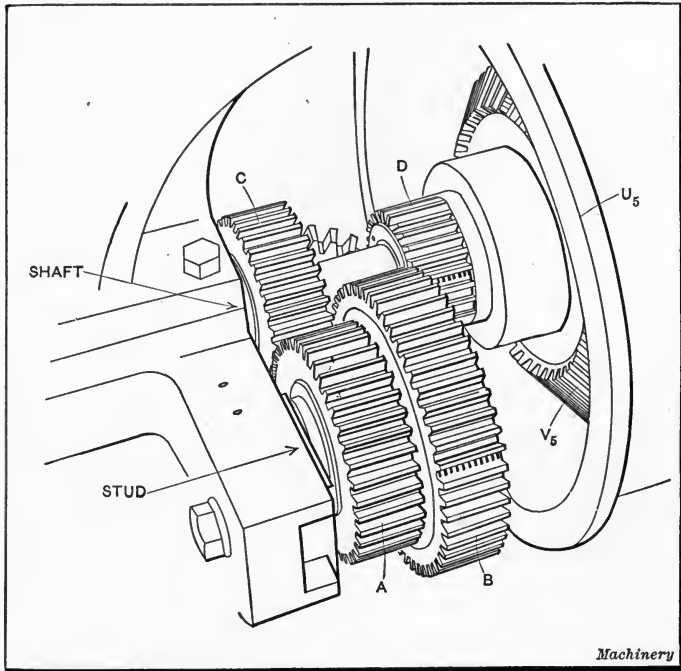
Gears used in Obtaining Changes of Spindle Speed
